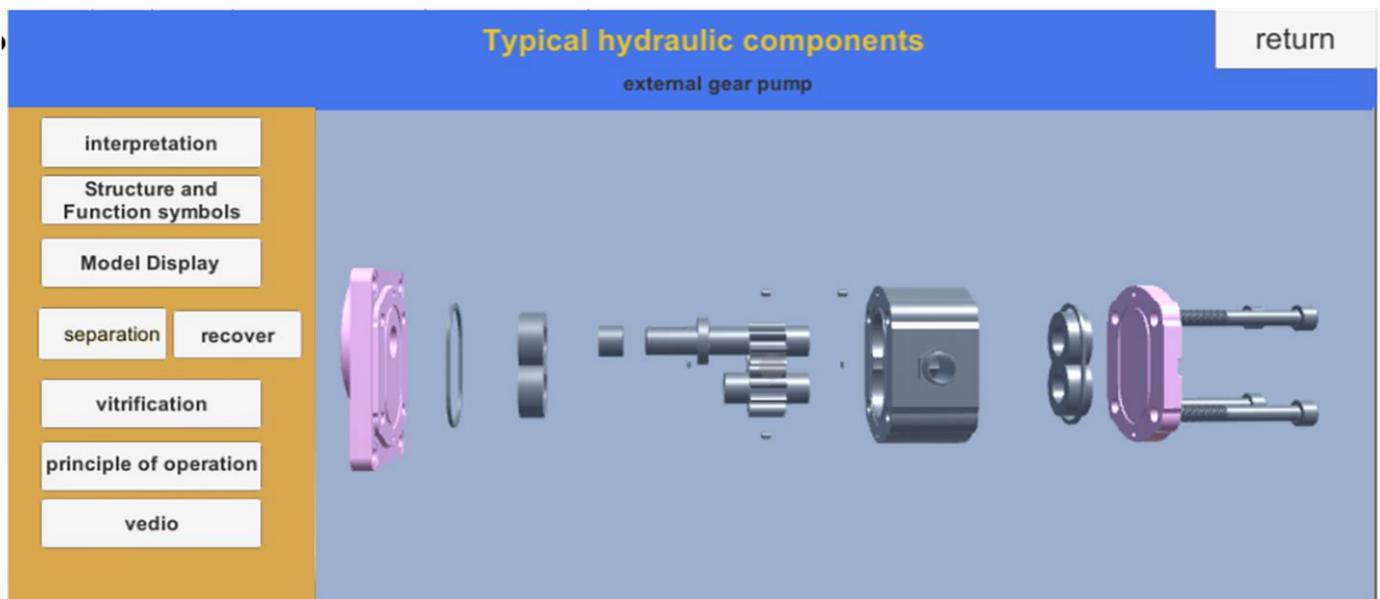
Three-dimensional (3D) model of an external gear pump.
